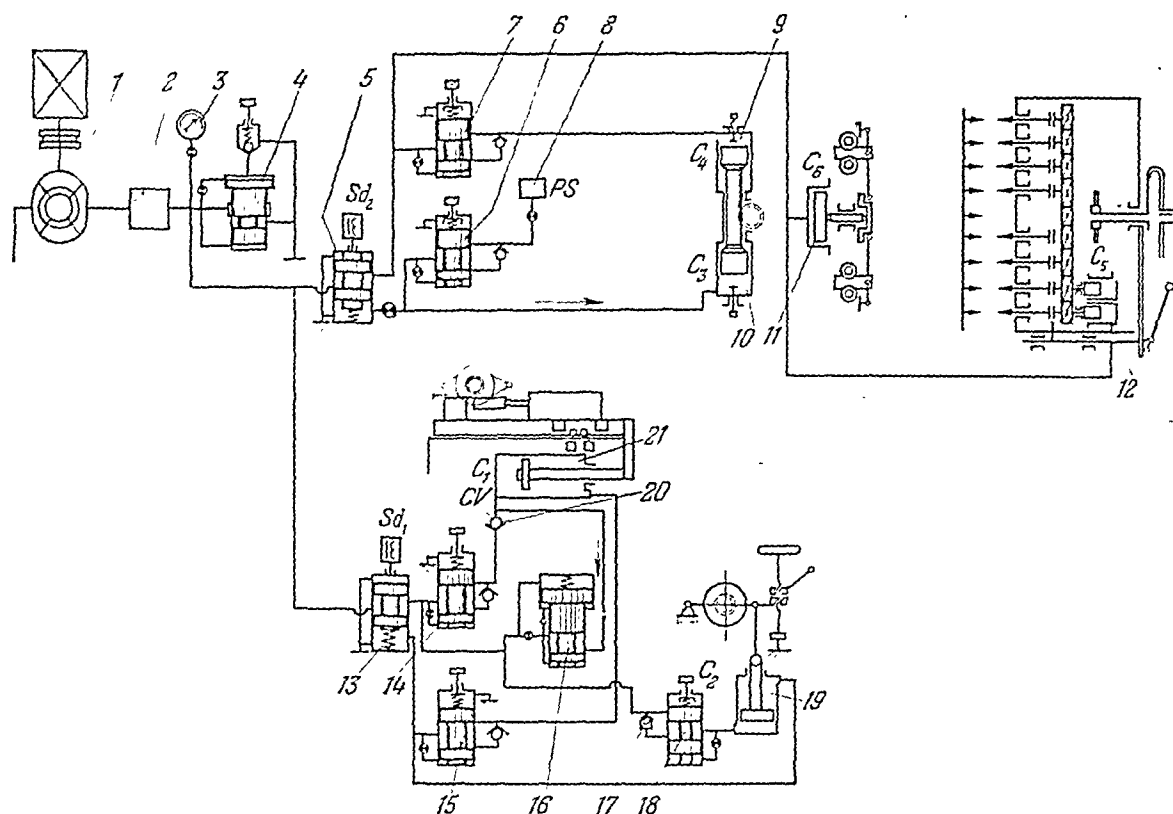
Hydraulic circuit of the model 6B-1M semiautomatic milling machine
